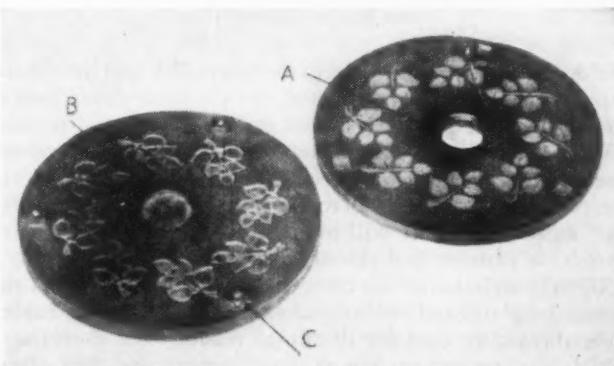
VULCANIZED MOLD BEFORE CHANNELING
